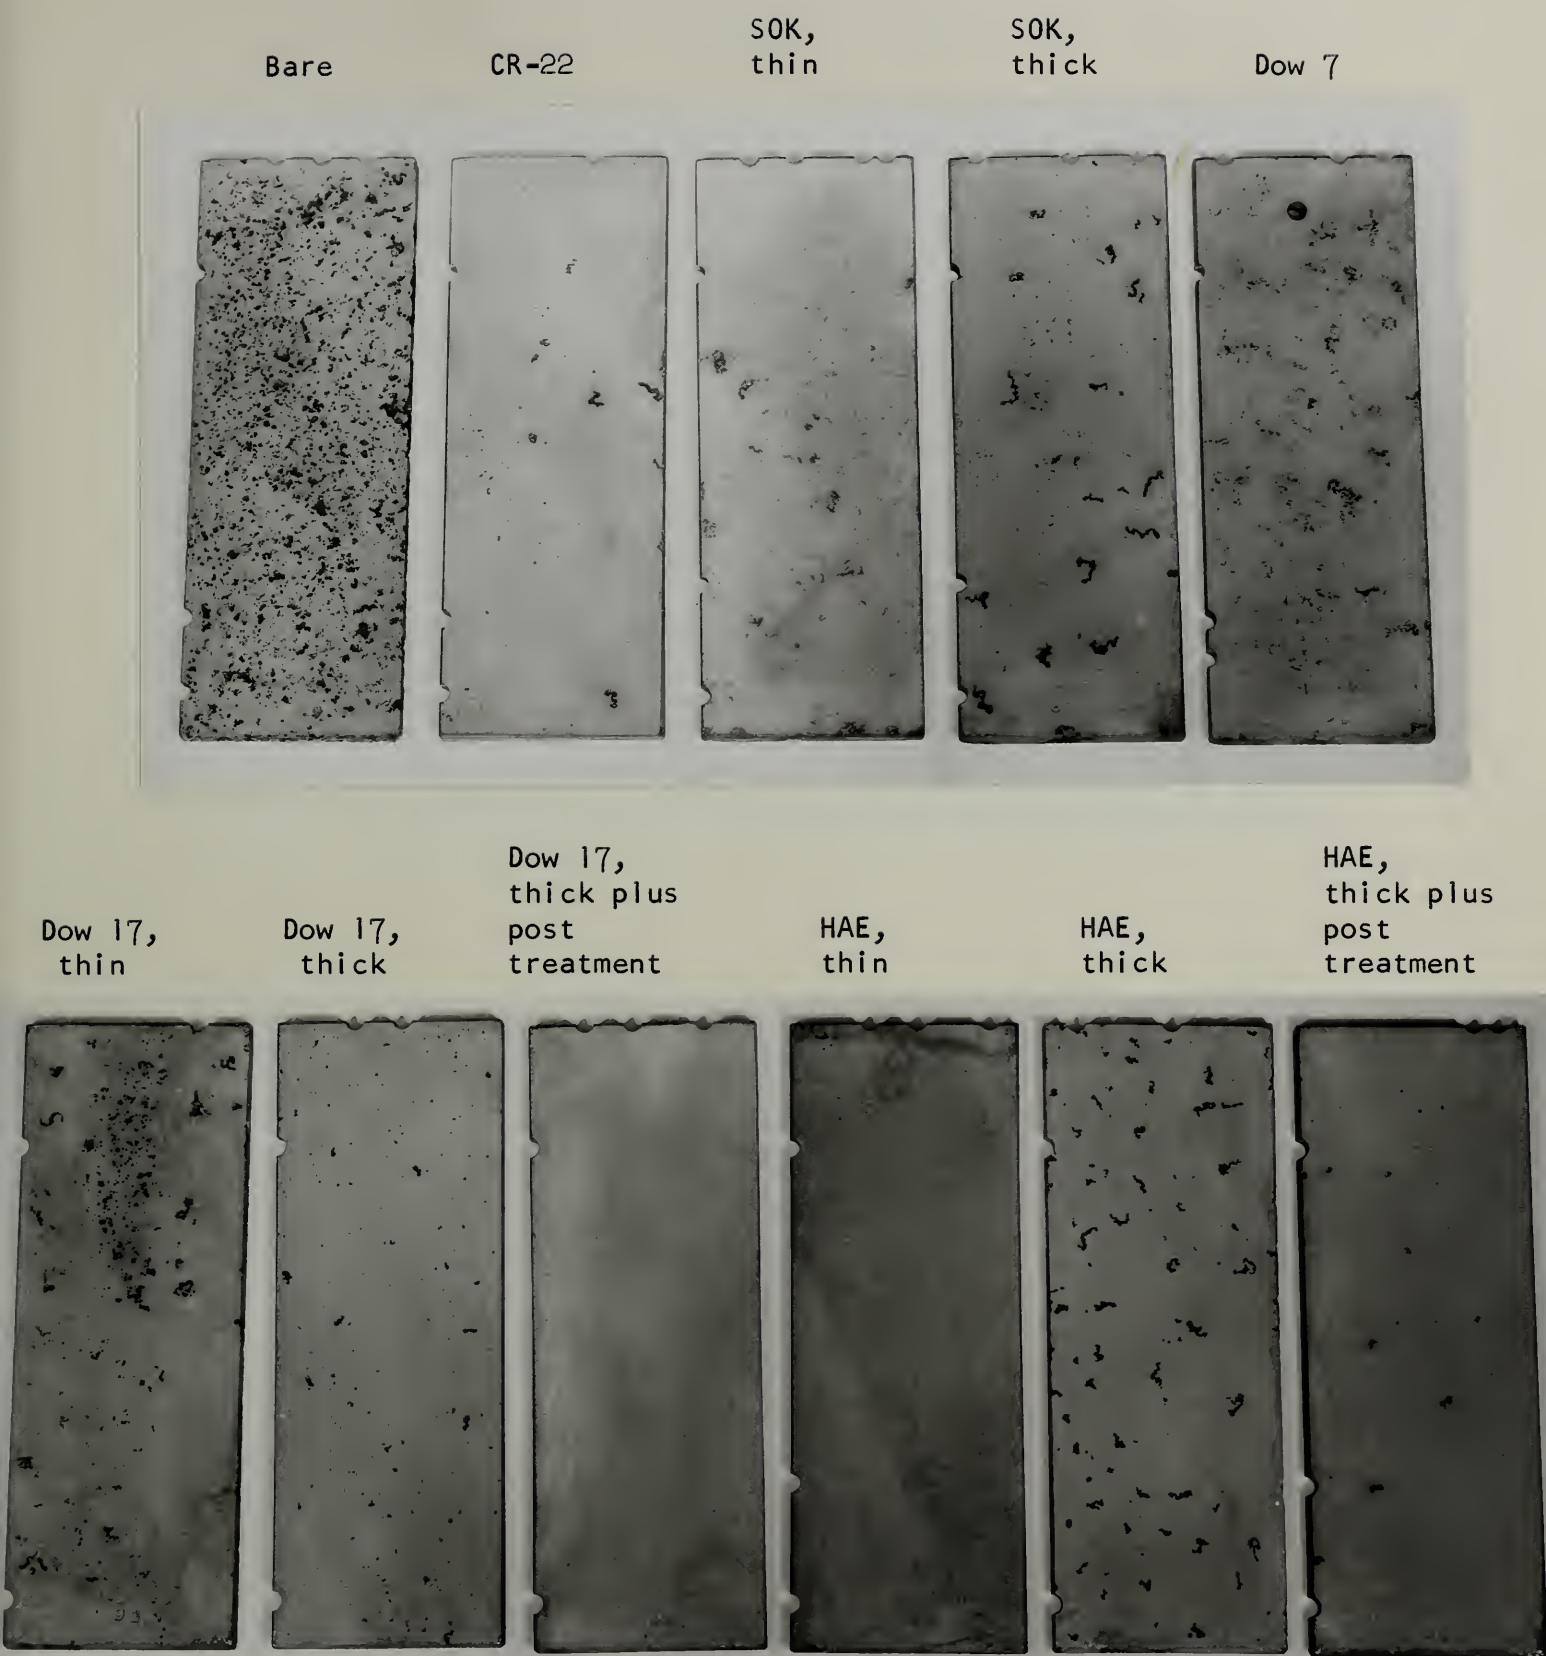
Representative surface treated sand cast AZ91C-T6 magnesium alloy specimens after 1000 hours exposure in the salt spray and after cleaning to remove corrosion products and conversion coatings. X 1/3.
